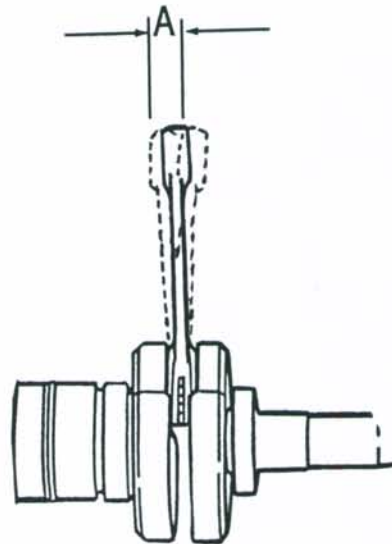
Wear of connecting rod big-end bearing and crankpin can be checked by determining the axial "rock" or "Side Shake" of rod at small end as shown at (A). Wear may be considered excessive if side shake exceeds 0.080 in. (2.0 mm).
